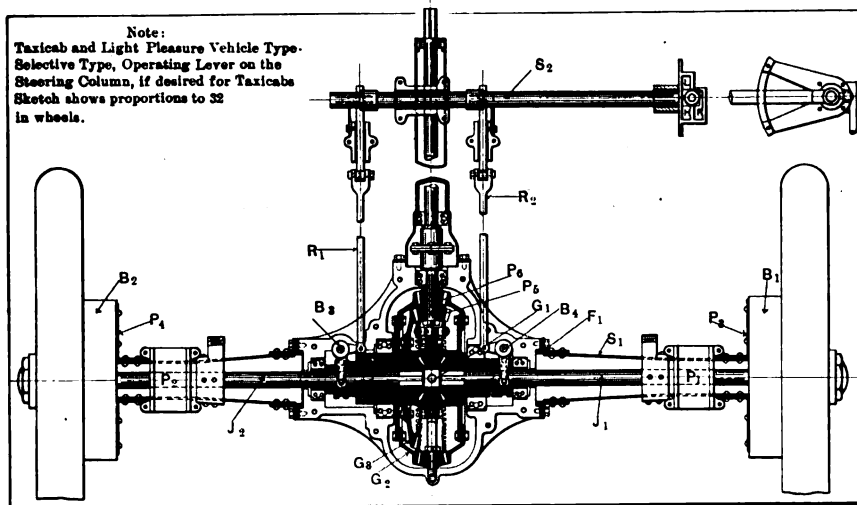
Type of axle as designed for taxicab and light car work, using bevel gears in the speed change system
